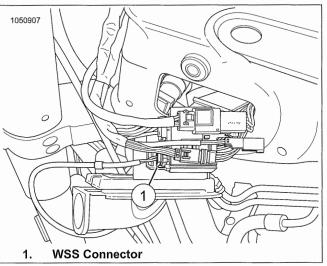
Front Wheel Speed Sensor Connector COMPLETE
